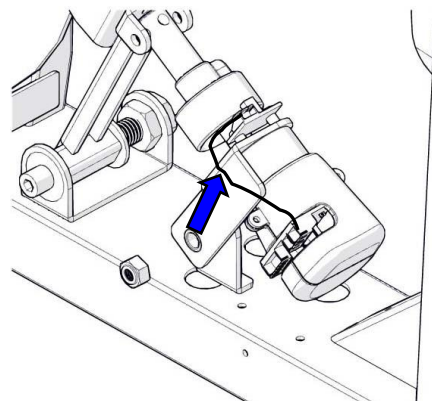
Pull out 8pins wire from center upright right tube then check it whole wire.
